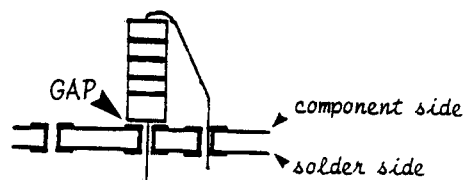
INSTALLING A RESISTOR ON ITS END.
